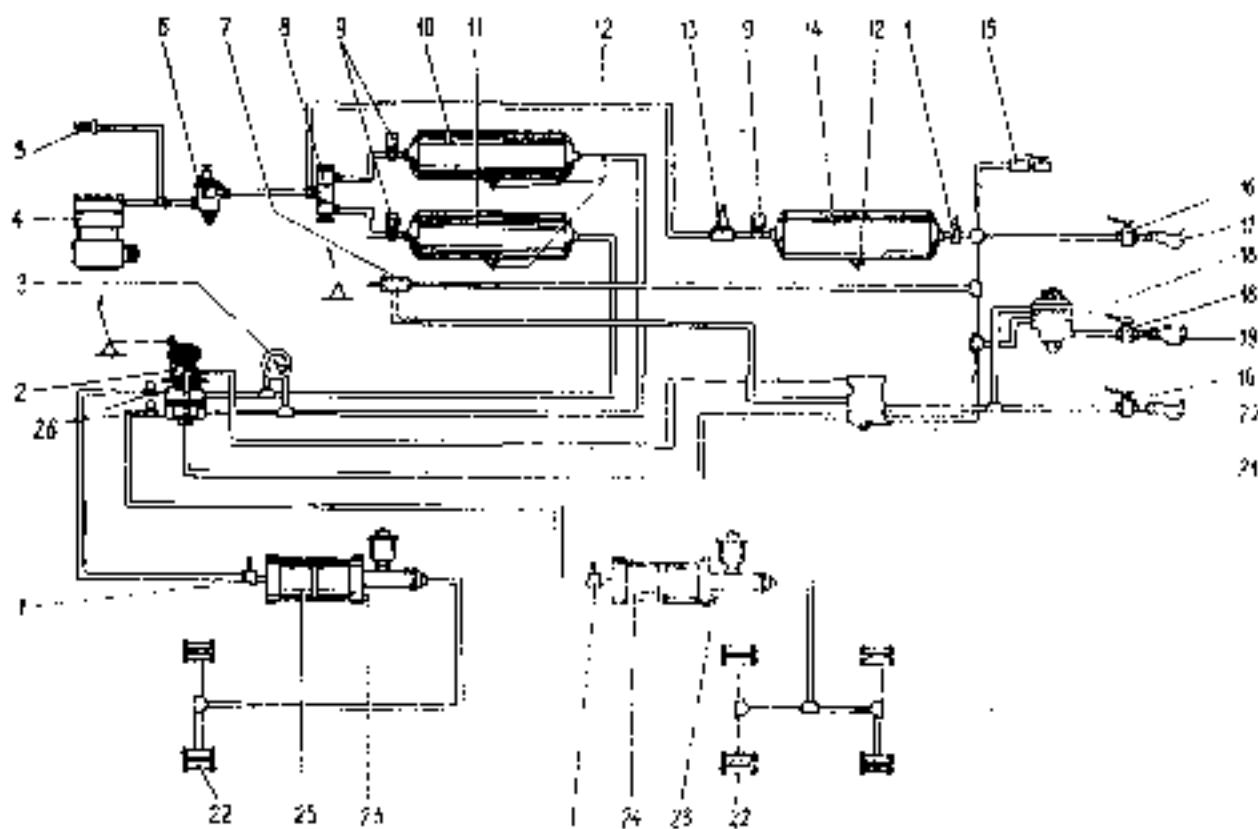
Layout Diagram of Service Brakes and Combined Drive of Trailer Brakes.
